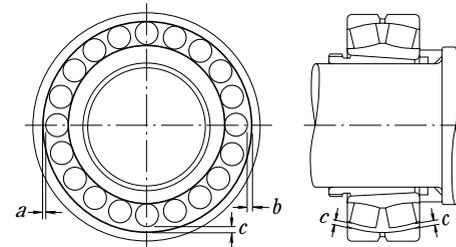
Measuring Clearance in Large Spherical Roller Bearing
